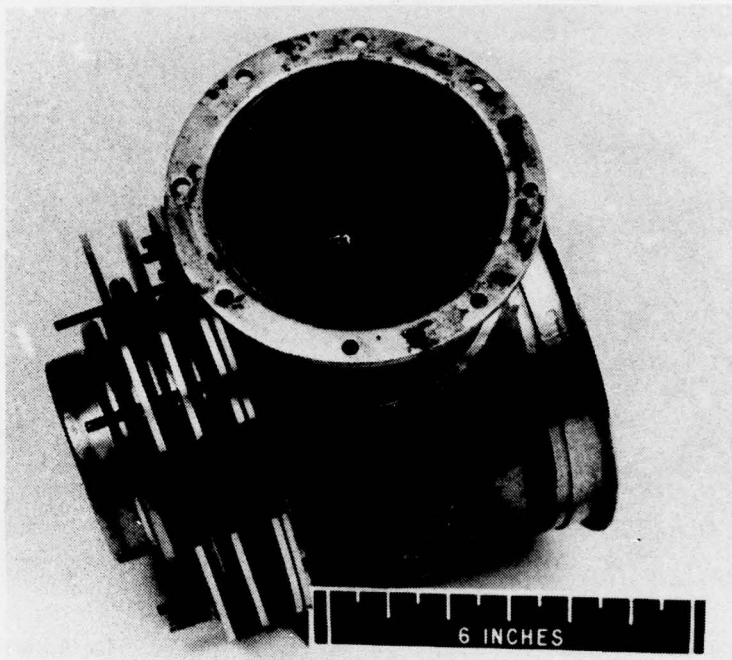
Combustor Housing With Pressure activated Bellows Assembly for Loading Rear Shroud to Exhaust Scroll Face Seal
